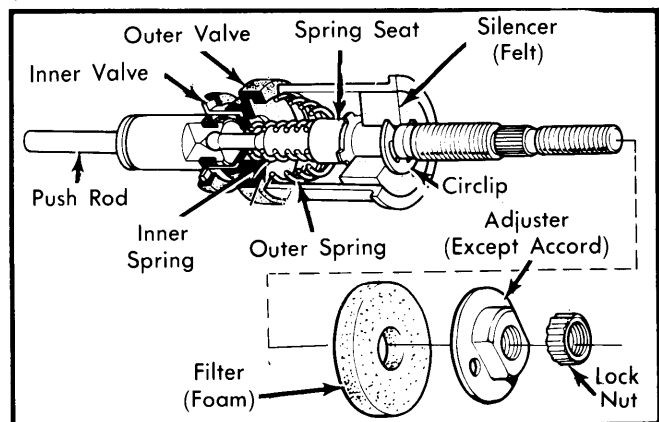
Exploded View of Power Brake Valve Holder Assembly
